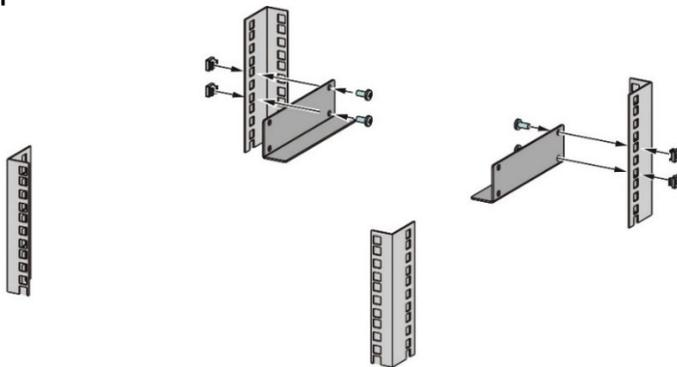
Installing the rear support brackets at the rear posts of the switch cabinet
